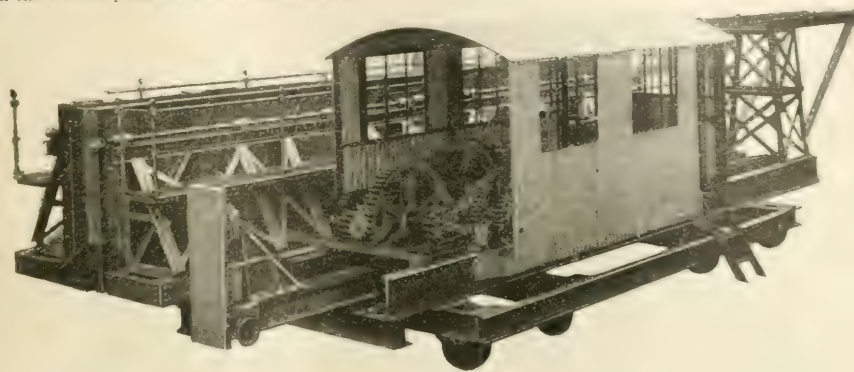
THE COKE CHARGER FOR STAMPED COAL.
